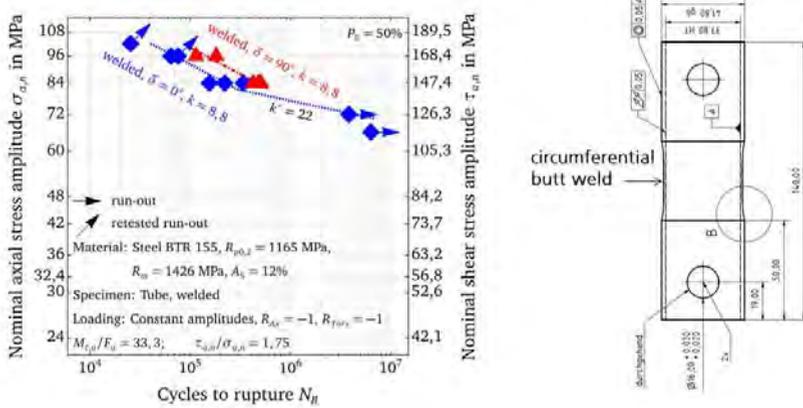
Fatigue behaviour of a laserbeam-welded thin tube-tube joints of a high-strength steel ($e = 12\%$) under combined axial loading and torsion
